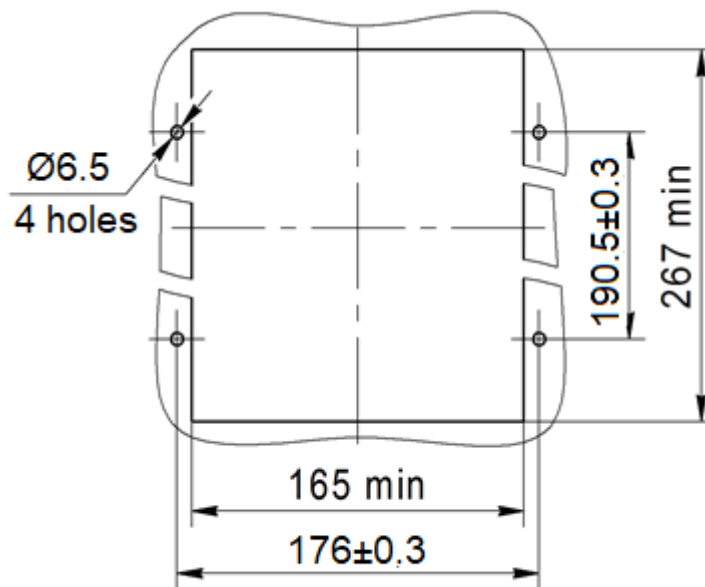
Panel layout for installation of the ED2 devices of ⅓ 19" design
